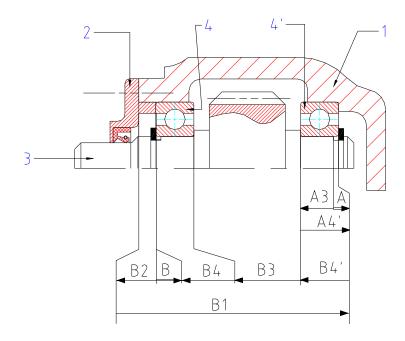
Design function A, assures the circlips not to make contact with both the shaft groove (3) and the roller bearing (4), simultaneously. The associated assembly dimension chain involves the component dimensions ai, with i the pieces number:
